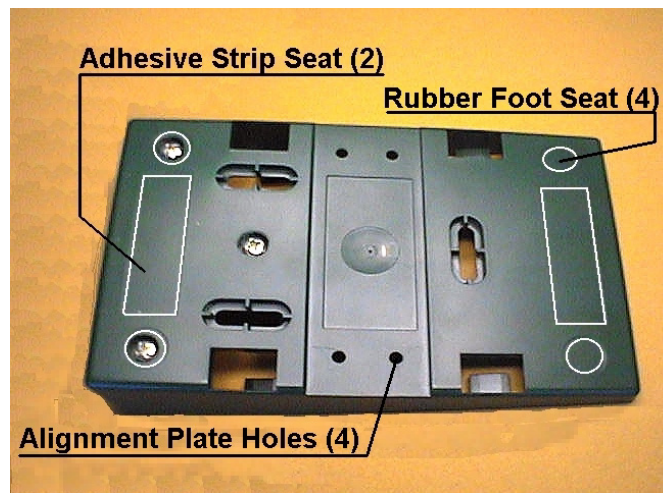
OM-DRAGON™ Mounting Base bottom view
